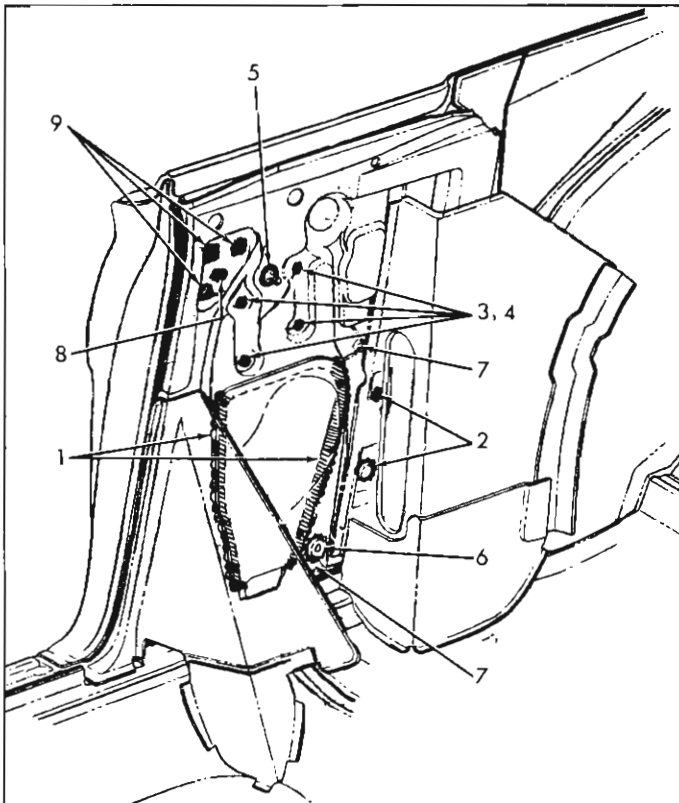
Quarter Inner Panel Sealing "67" Styles
